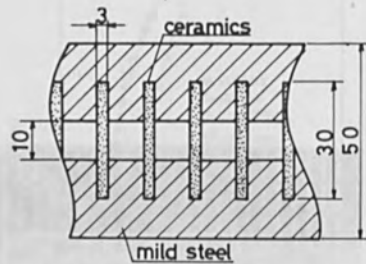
Schematic drawing of test piece with parallel-arranged ceramic strip fired by jig of steel.
